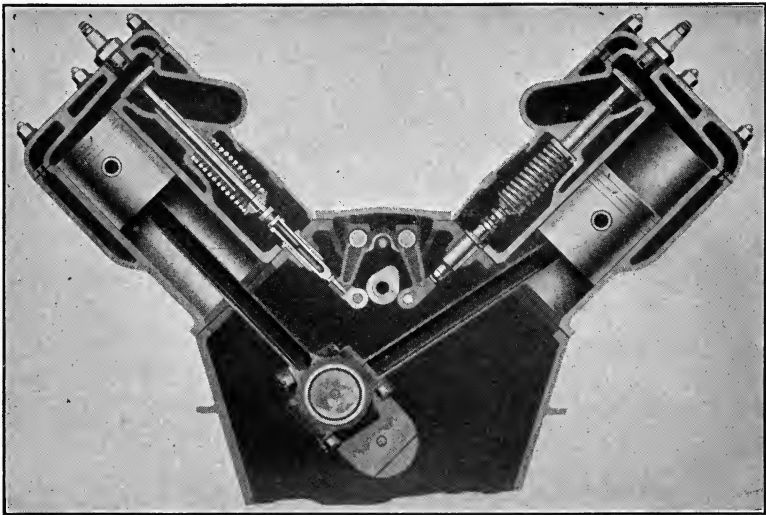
Sectional view of Cadillac eight-cylinder engine.
